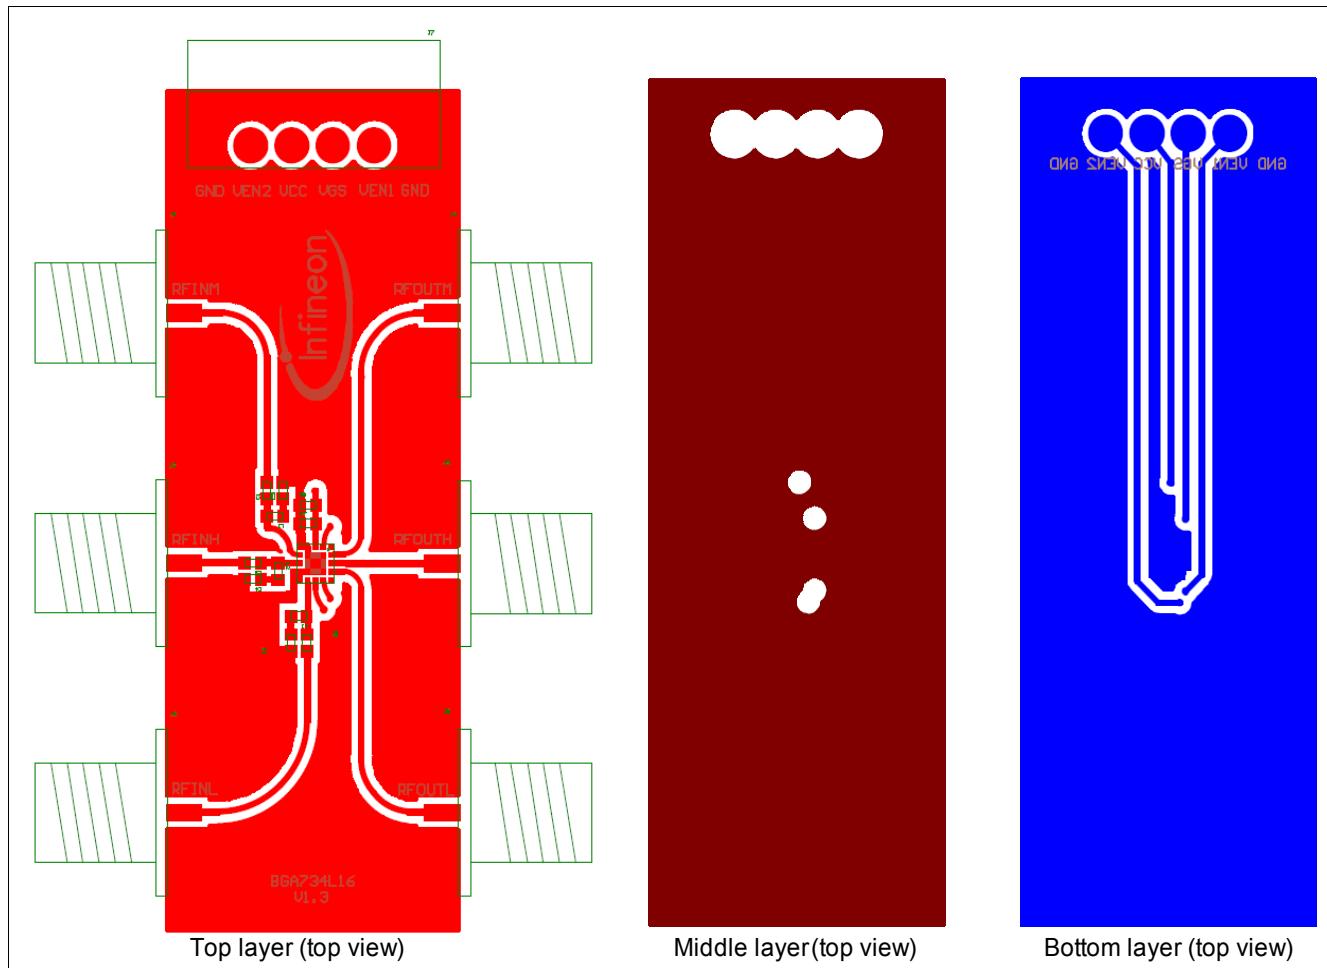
Application board layout on 3-layer FR4. Top layer thickness: 0.2 mm, bottom layer thickness: 0.8 mm, 35 µm Cu metallization, gold plated. Board size: 21 x 50 mm
